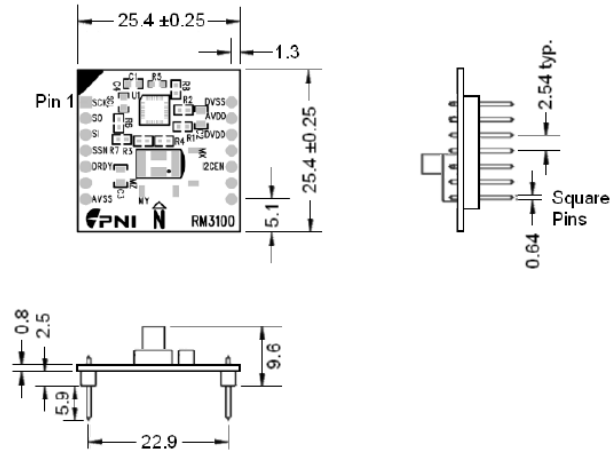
RM3100 Evaluation Board Mechanical Drawing
